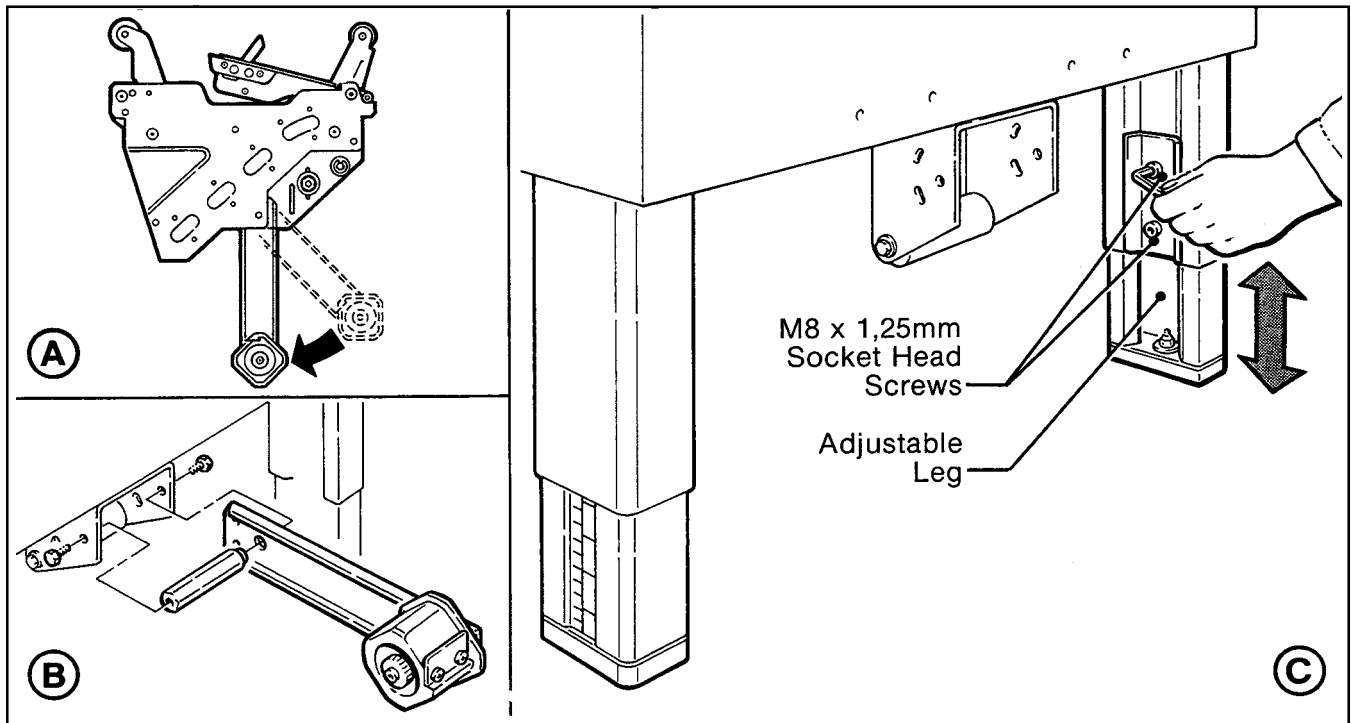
Machine Bed Height Adjustment and Lower Tape Drum Bracket Position
